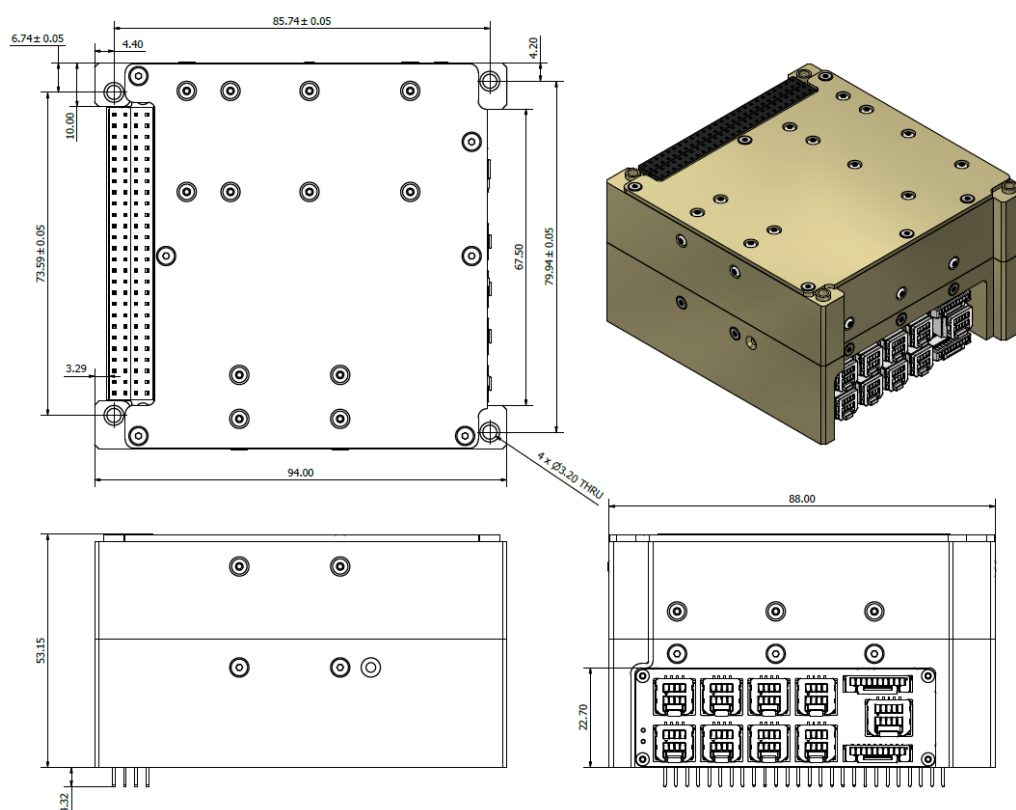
Indicative dimensions of a standard CubeADCS Core Stack for 3U
